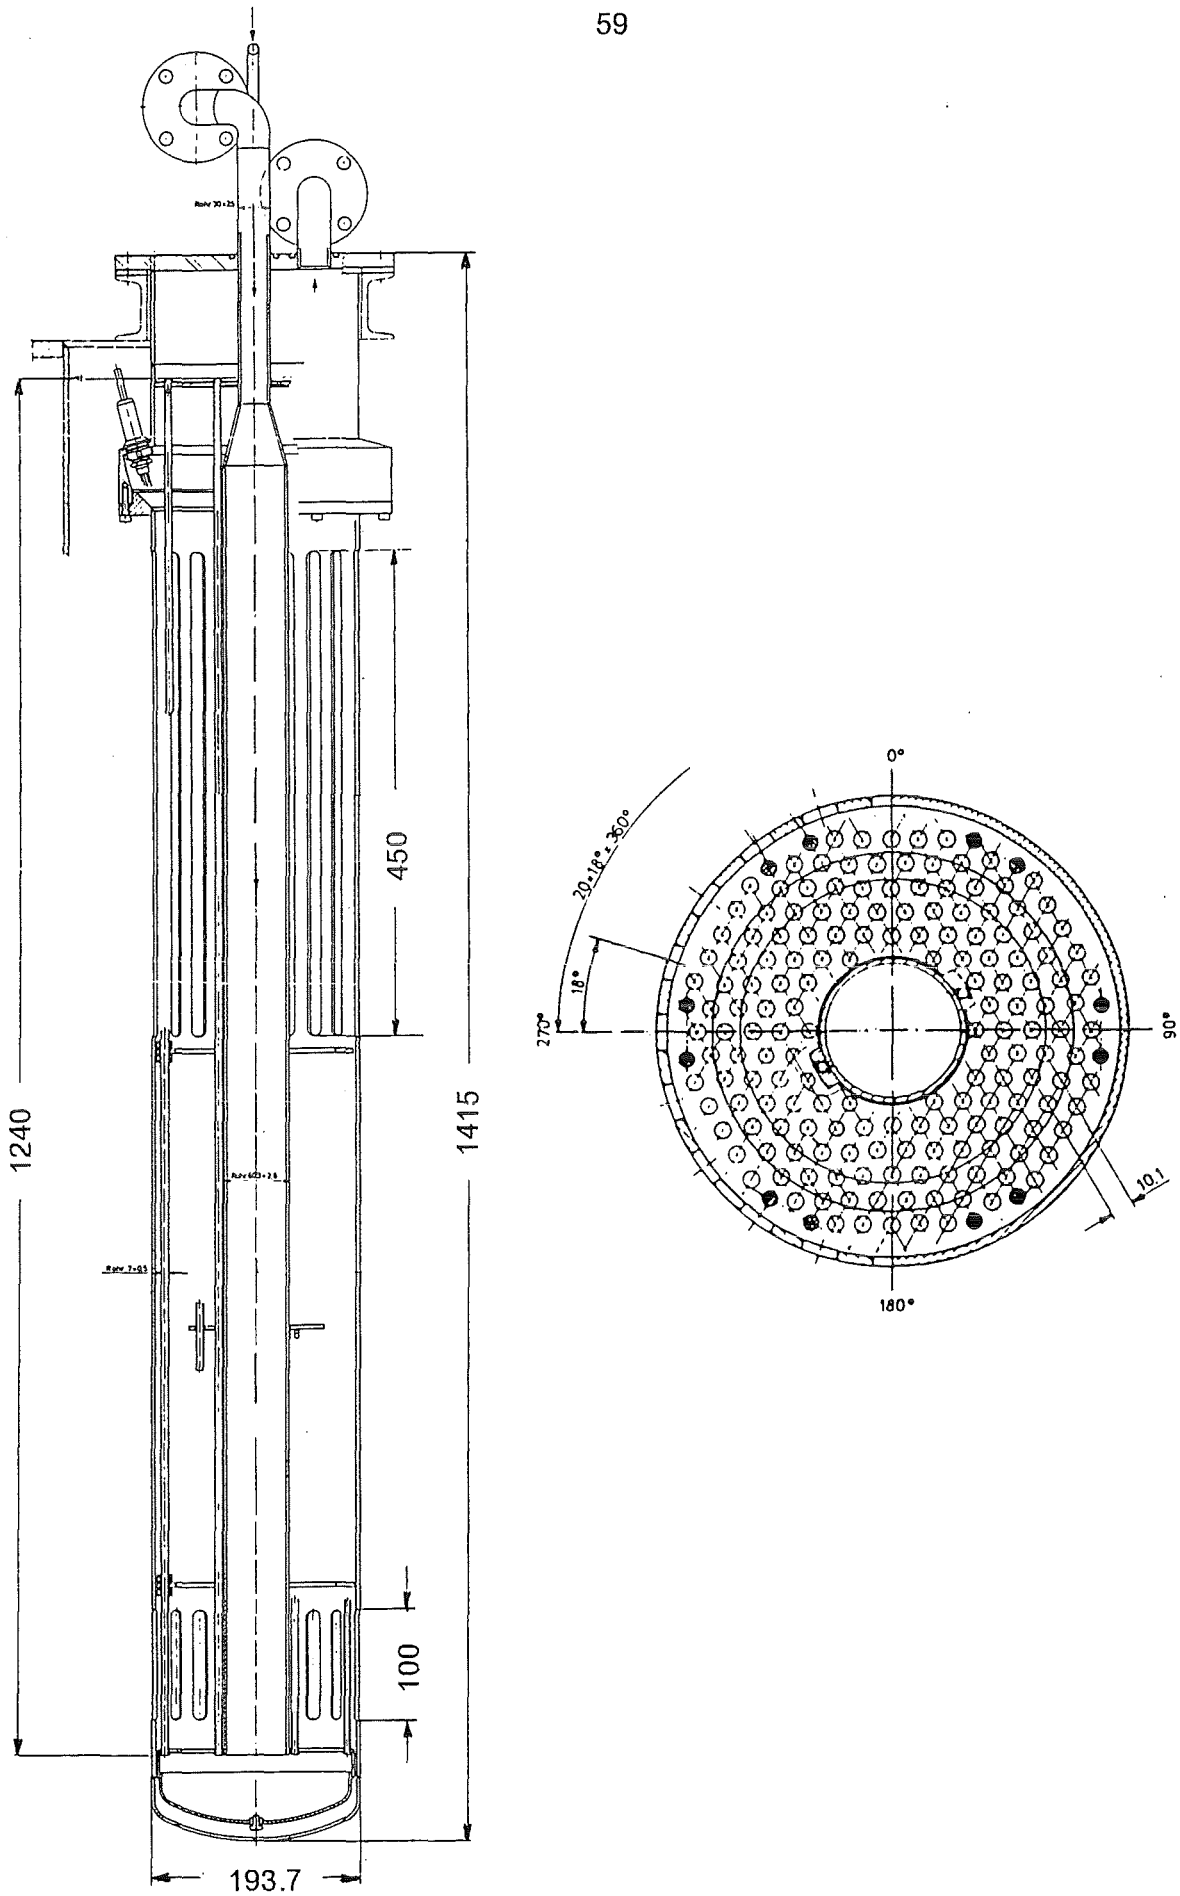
Cross-section of the decay heat exchanger (dimensions in millimeter).
